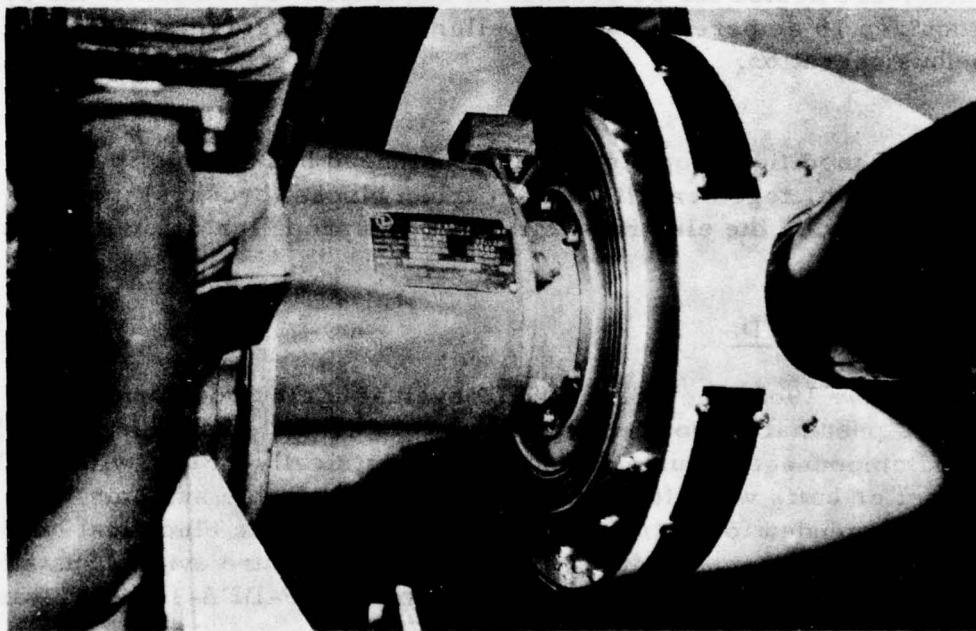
Modified propeller spinner bulkhead showing slip rings.
